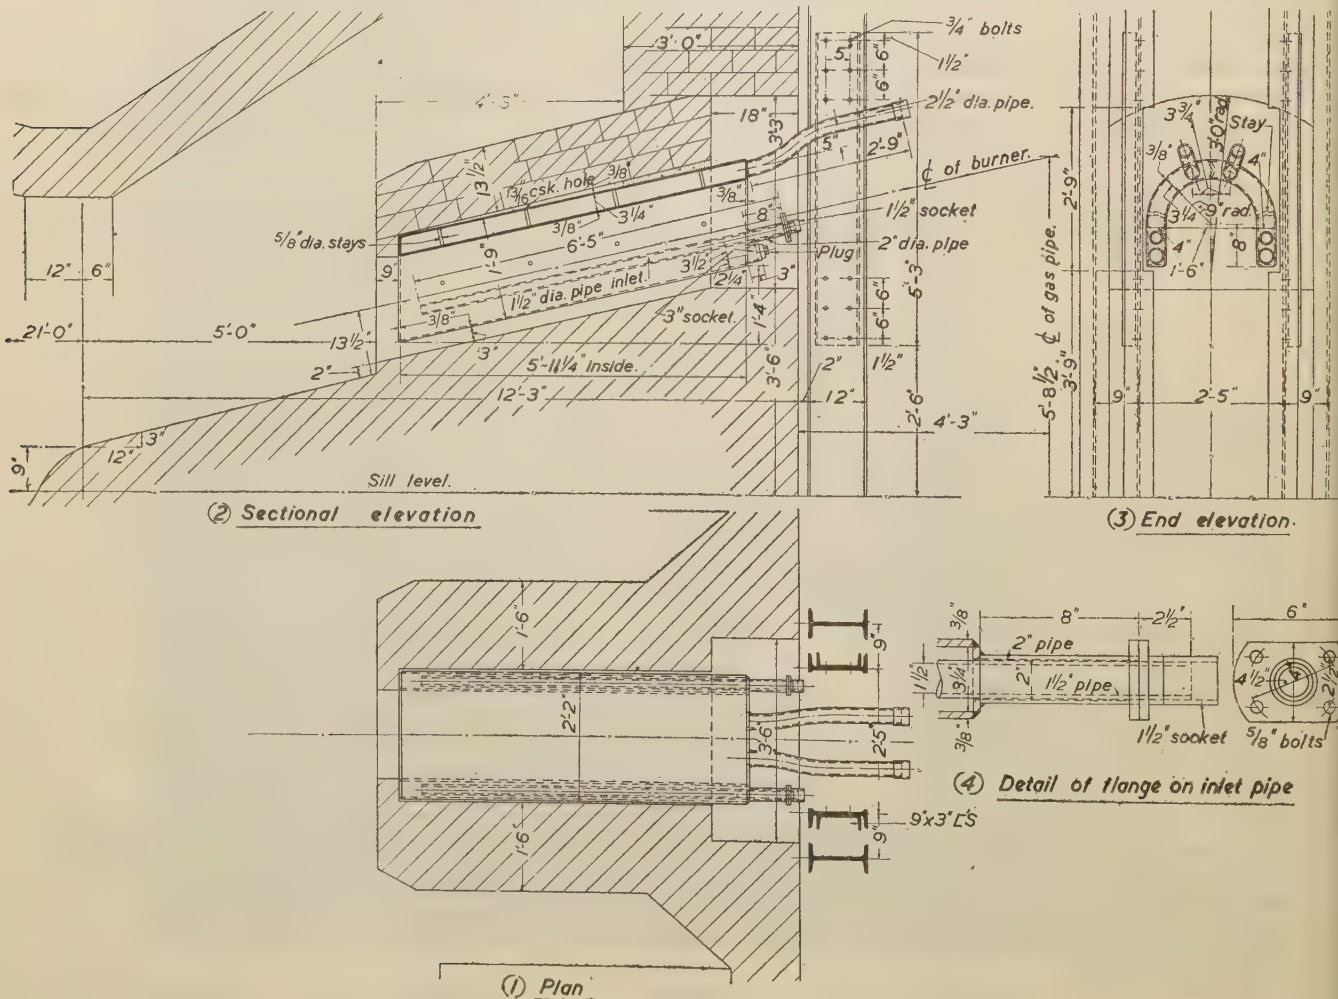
Arrangement of water-cooled jacket at end of furnace
